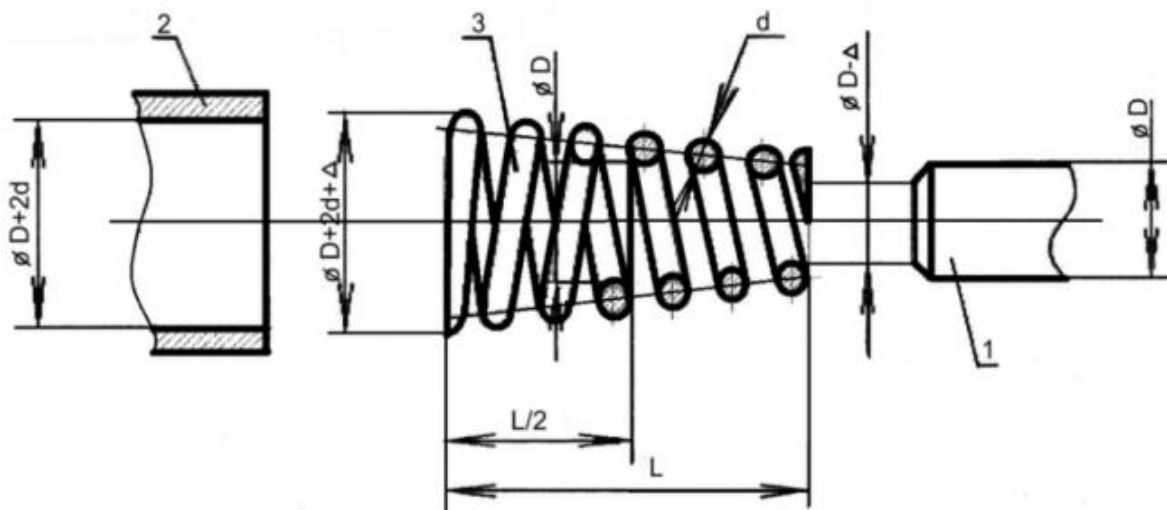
Conical sliding bearing for reciprocating rotary motion
